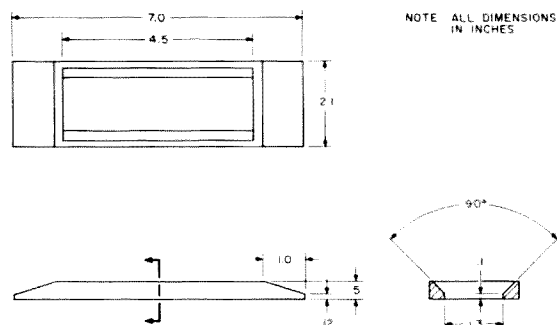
Bezel dimensional drawing. This is an optional item which can be added at any time. Its basic purpose is to act as a switch guard, but it also improves the appearance.
